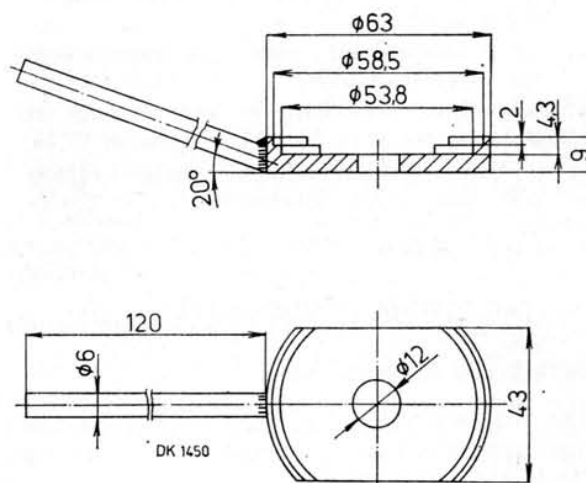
/3 - Mounting Plate of Dust Cup Fastening Ring
